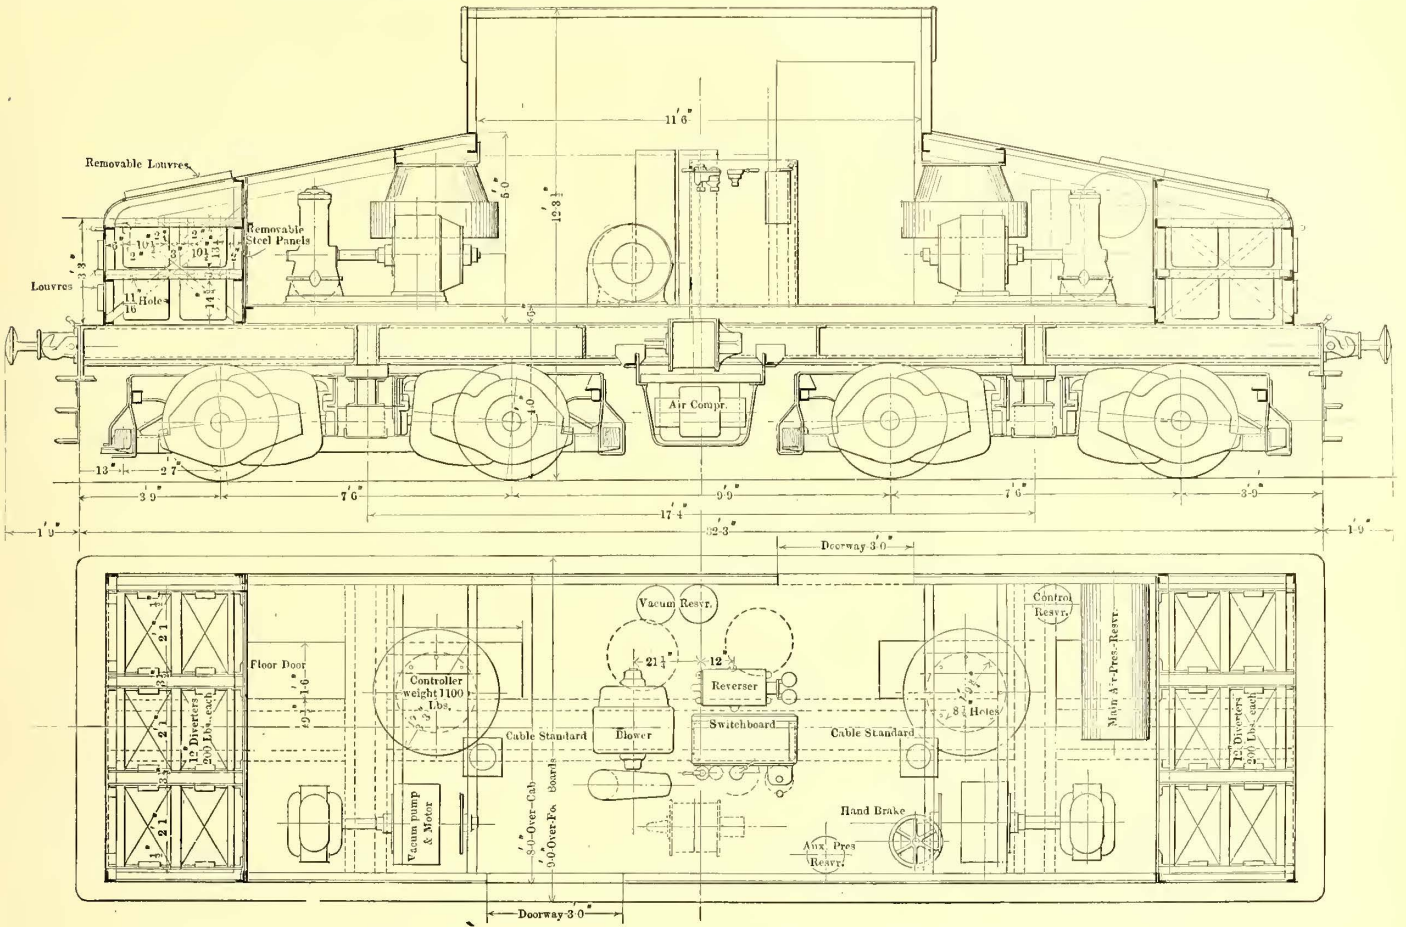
DIMENSIONED DRAWING OF METROPOLITAN ELECTRIC LOCOMOTIVE, SHOWING ALSO PLAN, ARRANGEMENT OF MACHINERY, ETC.
